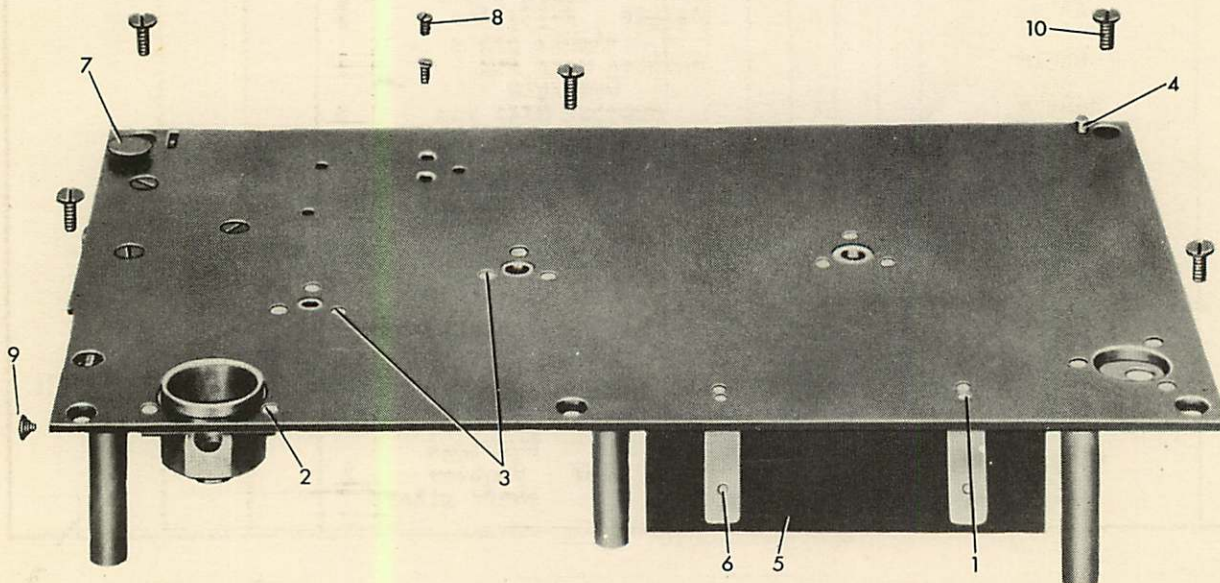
Mechanism Top Plate—Parts Exploded from Top
